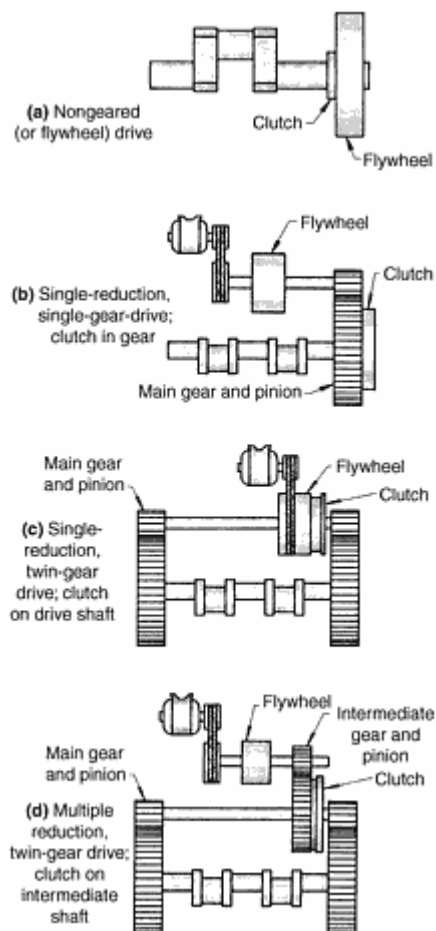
Four types of drive-and-clutch arrangements for mechanical presses
